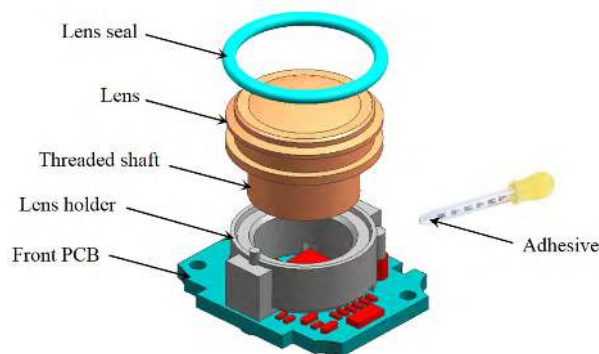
Assembling process of lens, lens holder, and front PCB.
